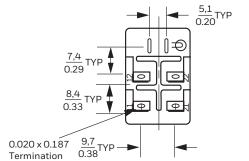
AML35 Paddle and AML36 Rocker Series Dimensions mm [in] or mm/in
